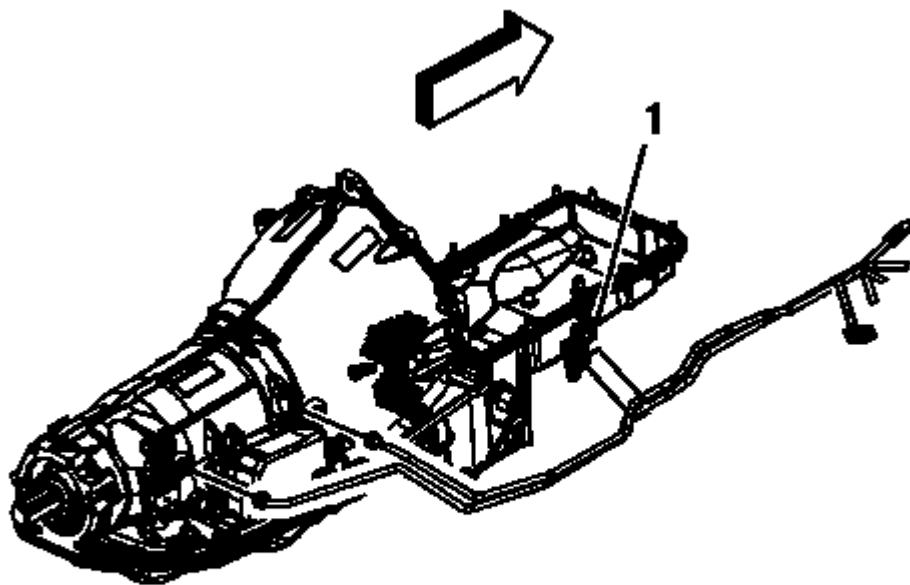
View Of Electrical Connector, Cable Channel Bolt & Pin
